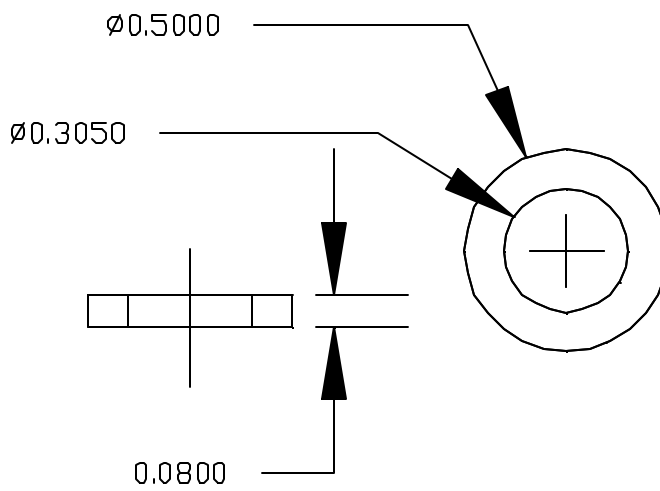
CAD drawing of the collector (dimensions in inches)
